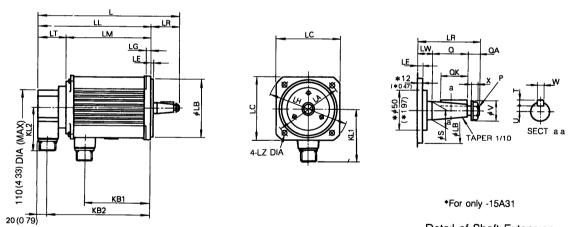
USASEM-02A32, -03A32, -05A32 (Straight Shaft)
